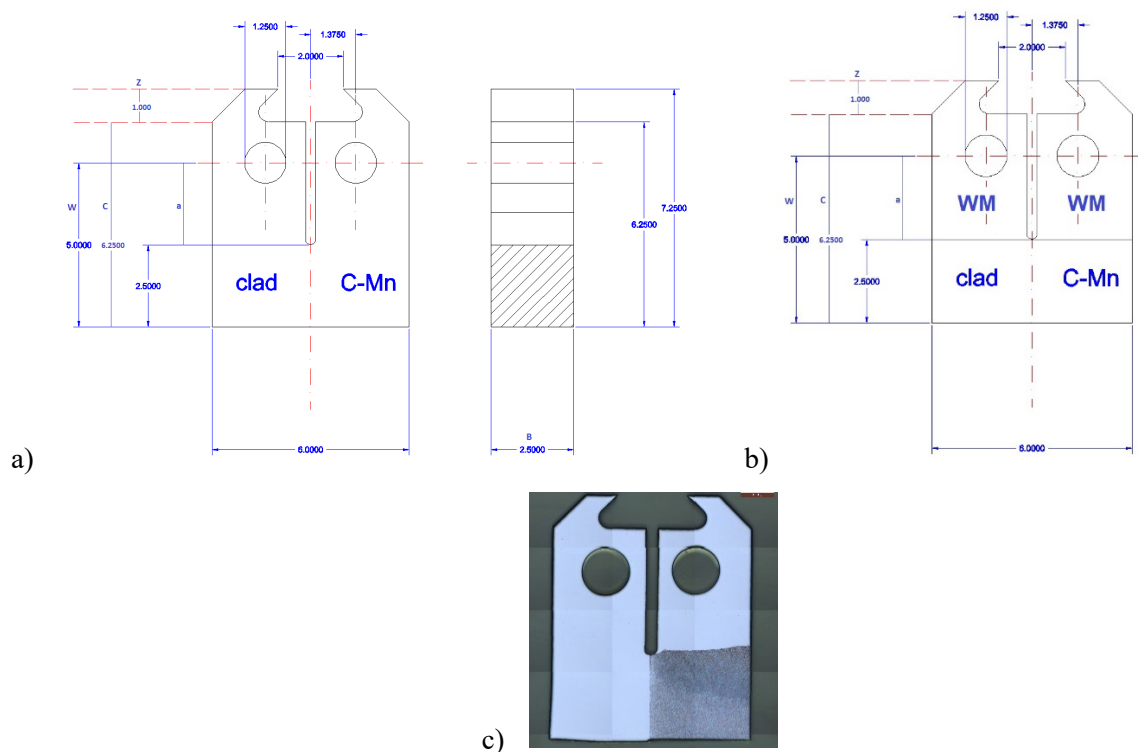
Compact tension specimen geometry, dimensions and material combinations, $W=5$ mm, $B=2.5$ mm, $a=2.5$ mm, $C=6.25$ mm, $z=1.0$ mm, notch radius= 0.15 mm. a) Not welded b) Welded. In the welded specimens, the notch tip is located at the triple point between weld metal, clad and CMn steel. c) Lightly etched CT specimen from welded pipe
